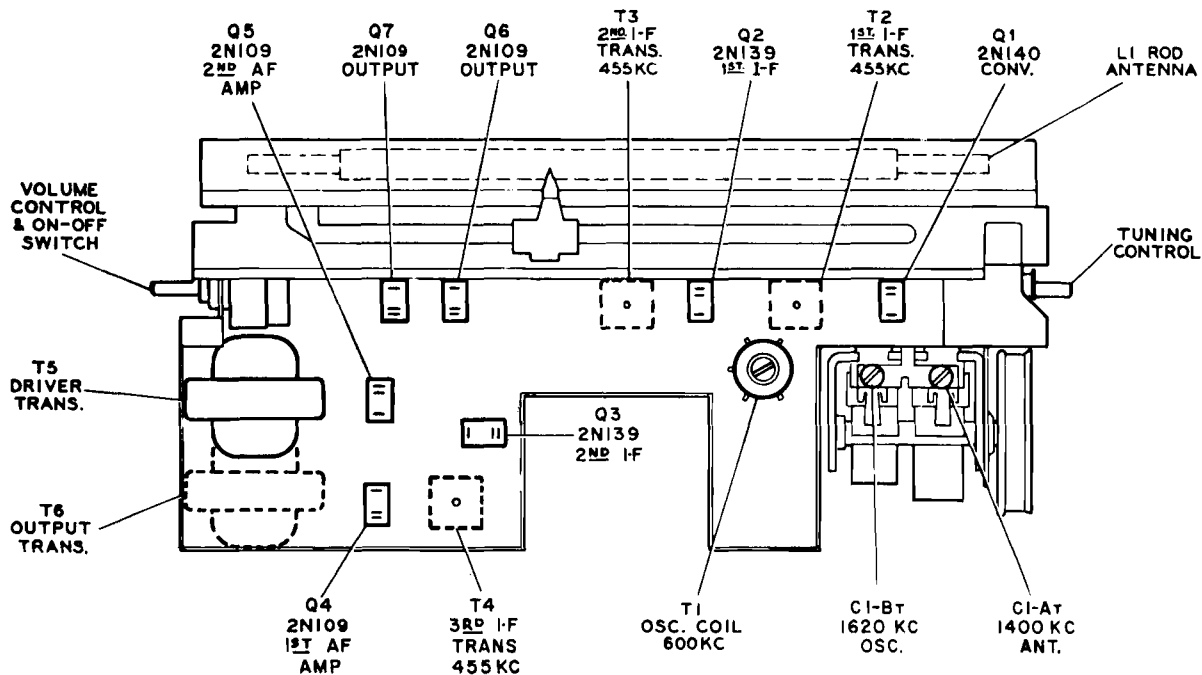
Chassis layout used in the 8-BT-10K receiver. A "slide-rule" type dial is employed.
